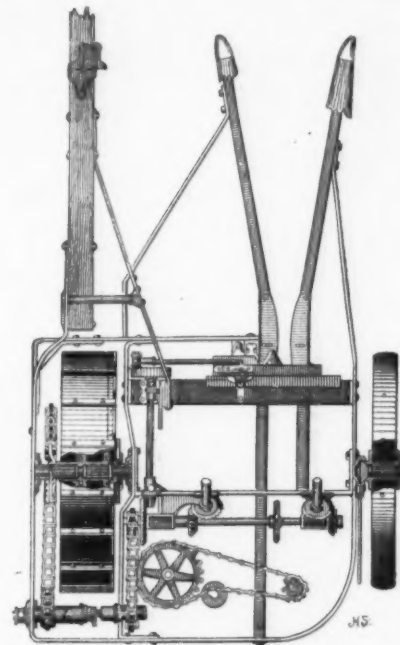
FRAME OF CORN BINDER, SHOWING MECHANISM FOR DRIVING CUTTER KNIFE, GEAR SHAFT FOR DRIVING CHAINS AND BINDING DEVICE, AND ROLLER BEARINGS.
